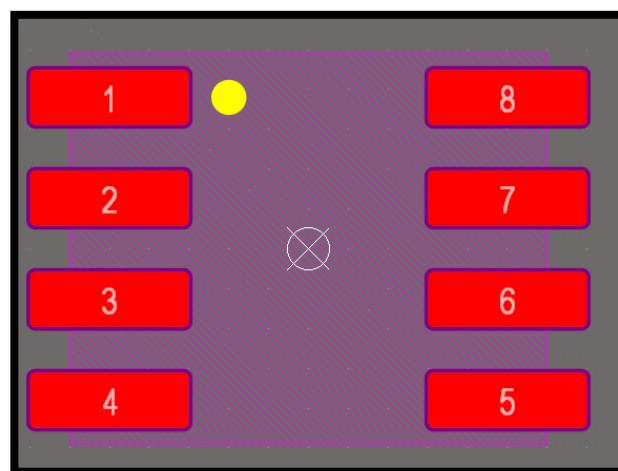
The PCB Footprint for the MAX4080TASA+T
